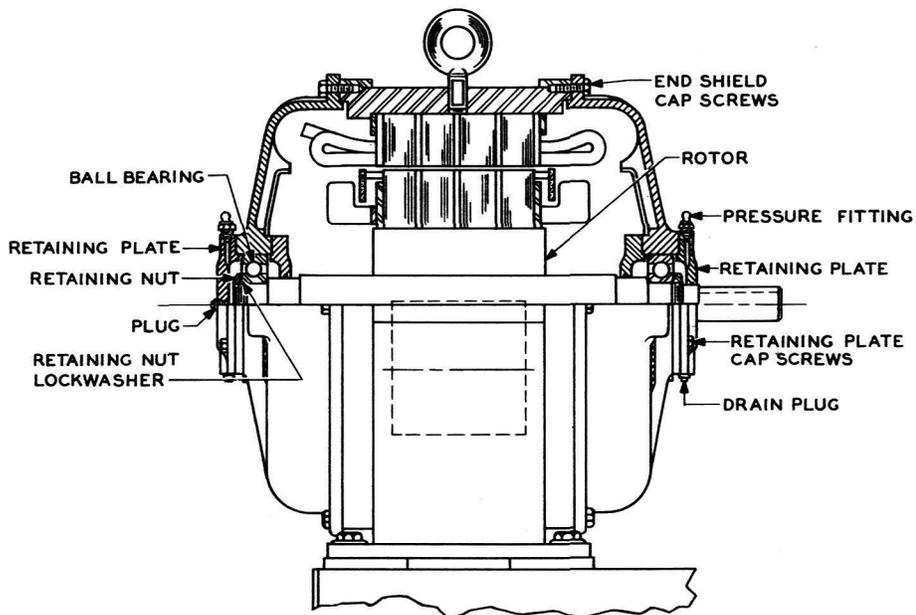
Sectional View of Typical Motor With Ball Bearings
